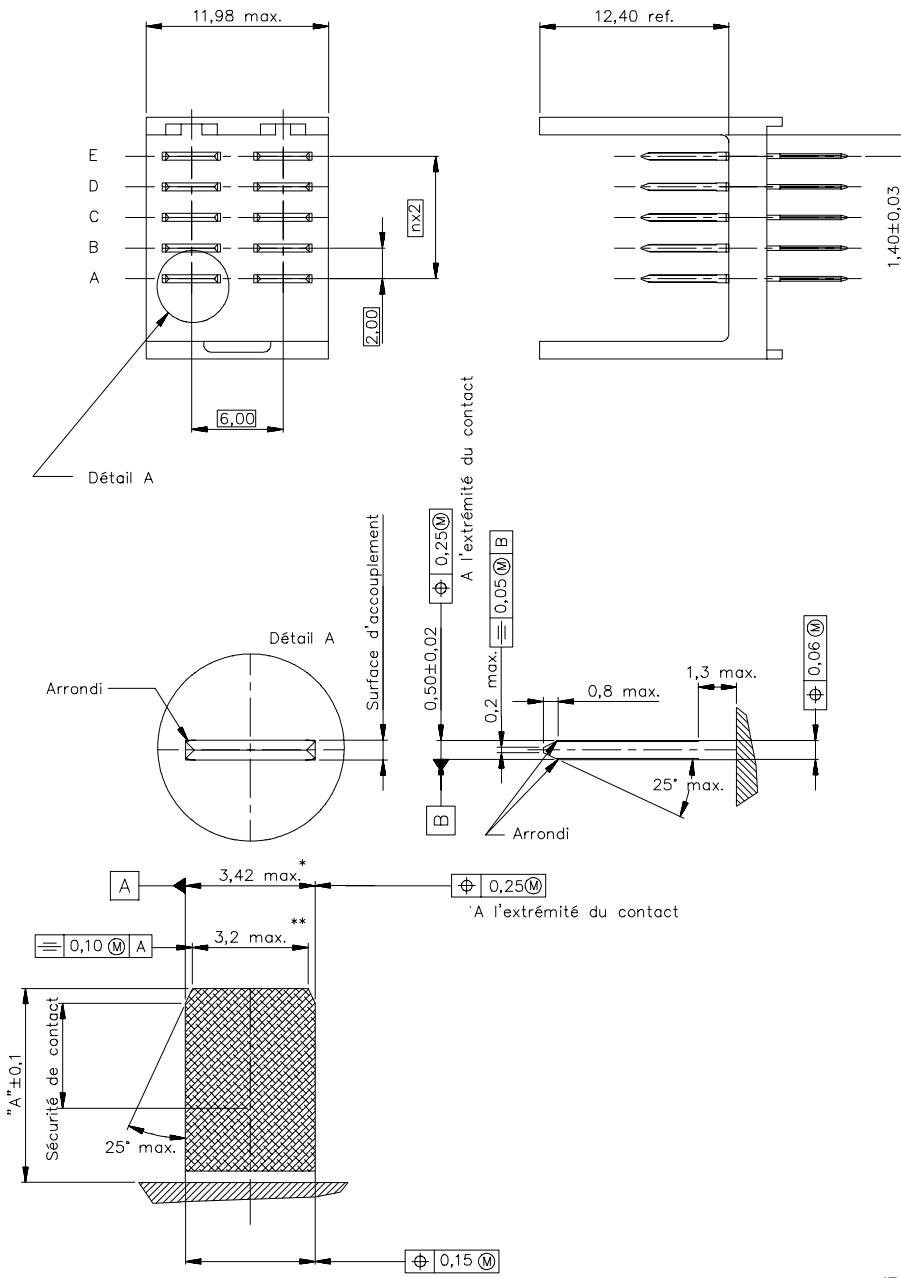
Dimensions of fixed signal connector module, style AE
